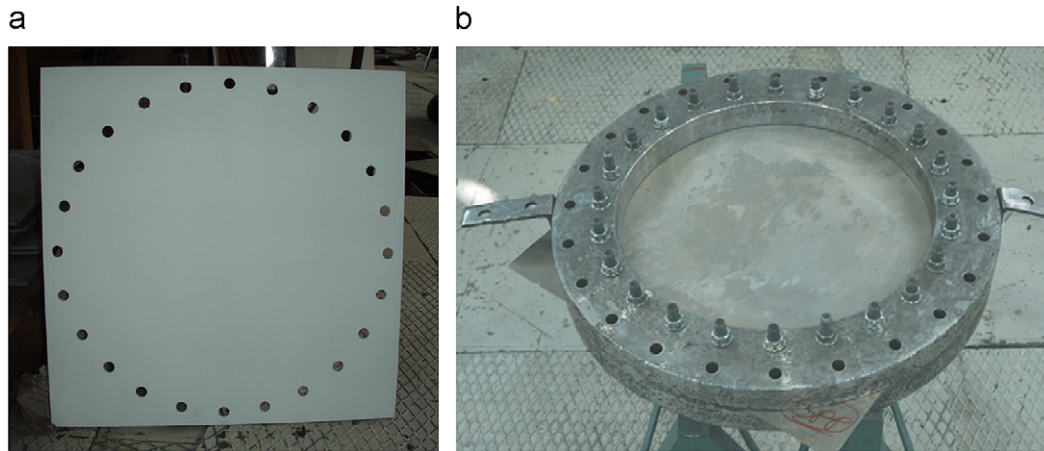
(a) Target plate before and (b) after the mounting in the clamping rings.
